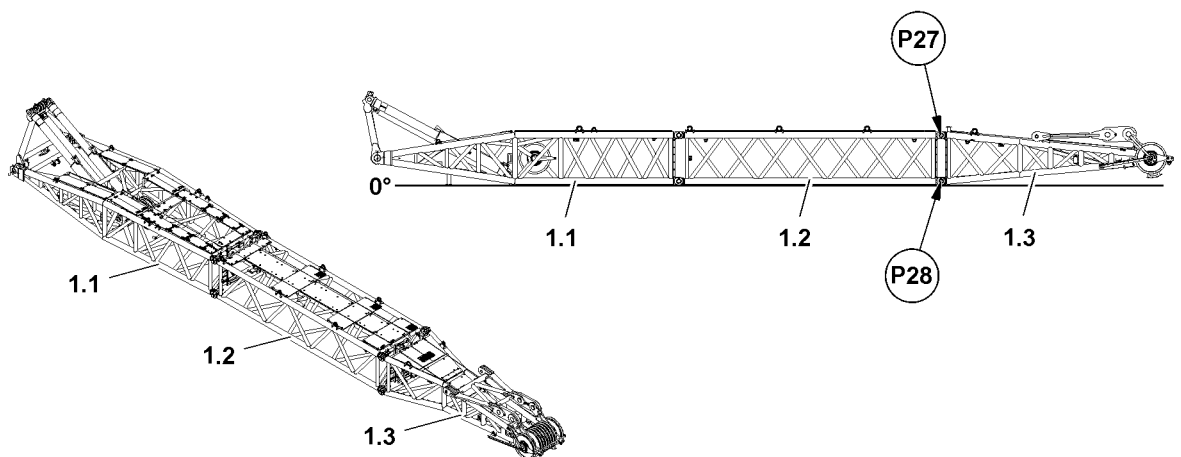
WA-frame preassembly — Assembling the WA-frame end section on the WA-frame intermediate section
